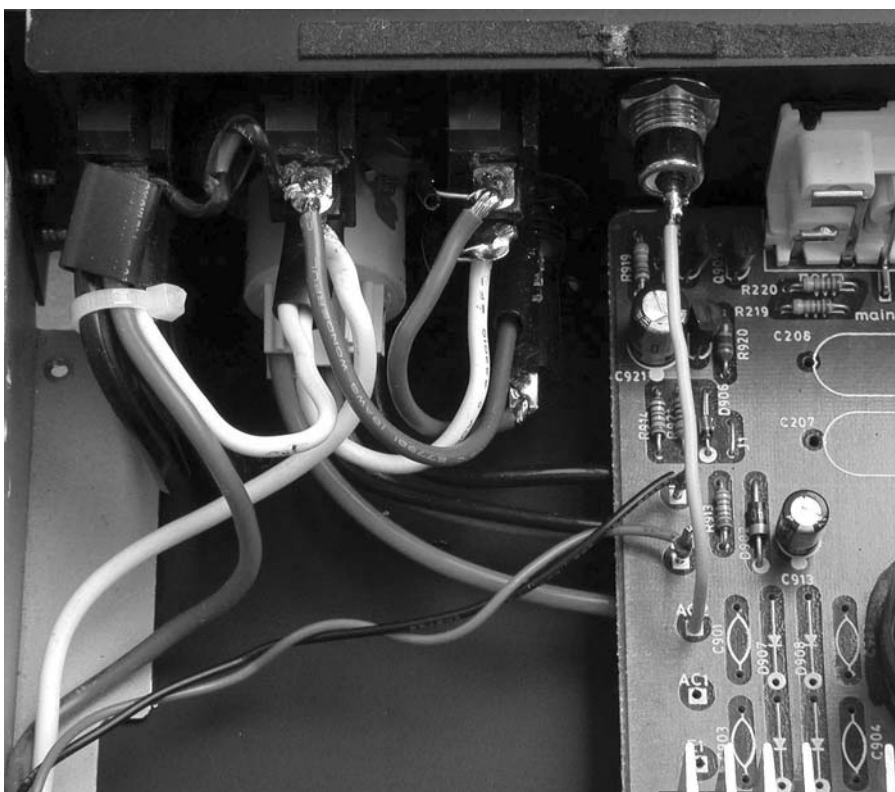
Inside the preamp, top view, showing the muting circuit bias supply connection to the AC2 hole on the main PC board.
